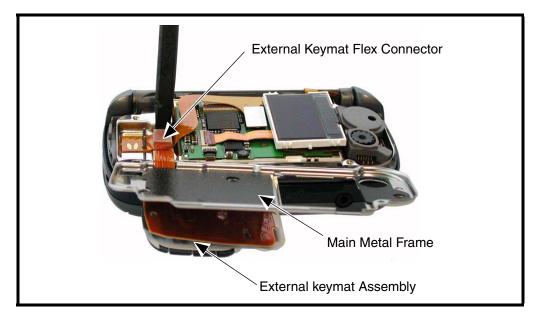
Removing the External Keymat Assembly, and Main Metal Frame
